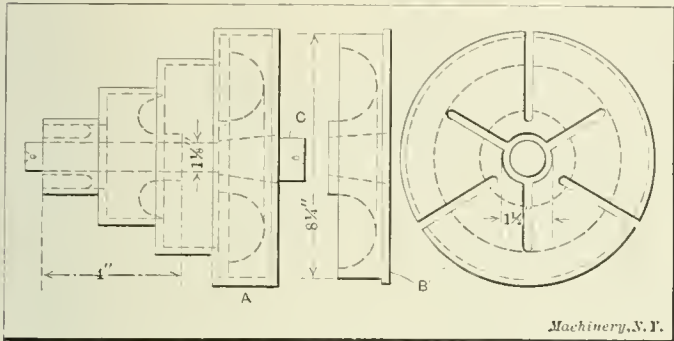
Details of Expansion Mandrel and Disk for Turning Cones
